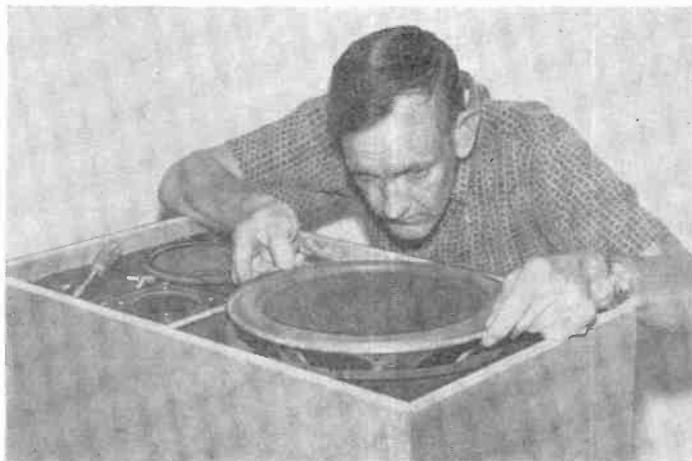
To insure proper air seal, be sure to place rubber, felt, or other adequate gasket material between speaker rims and speaker mounting board.
